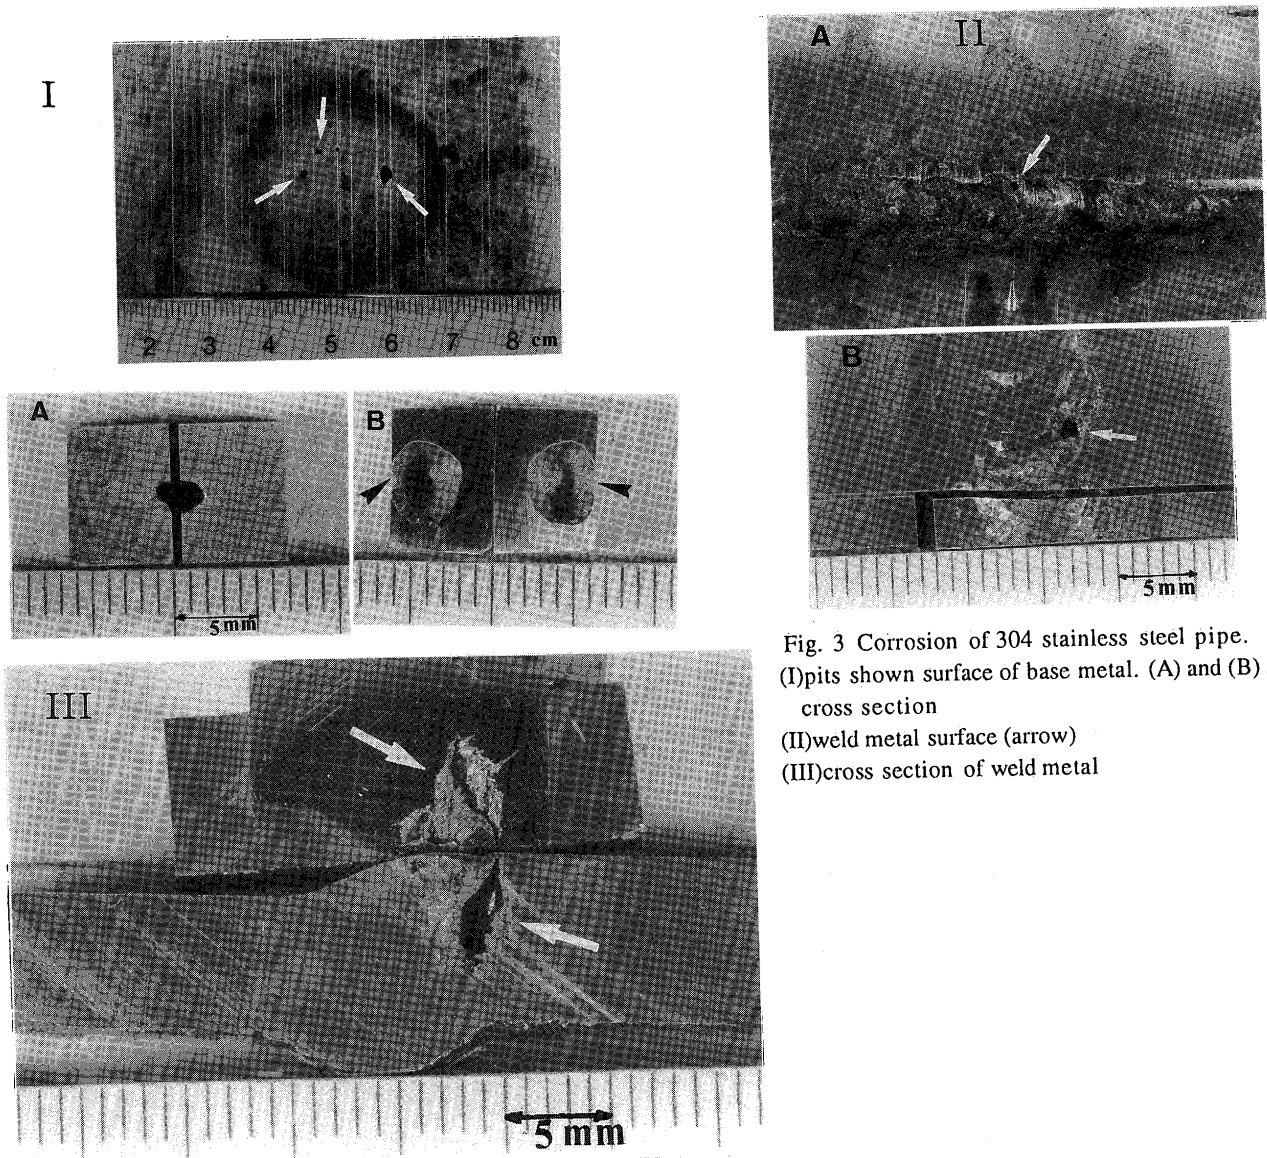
Corrosion of 304 stainless steel pipe. (I)pits shown surface of base metal. (A) and (B) shows cross section (II)weld metal surface (arrow) (III)cross section of weld metal
